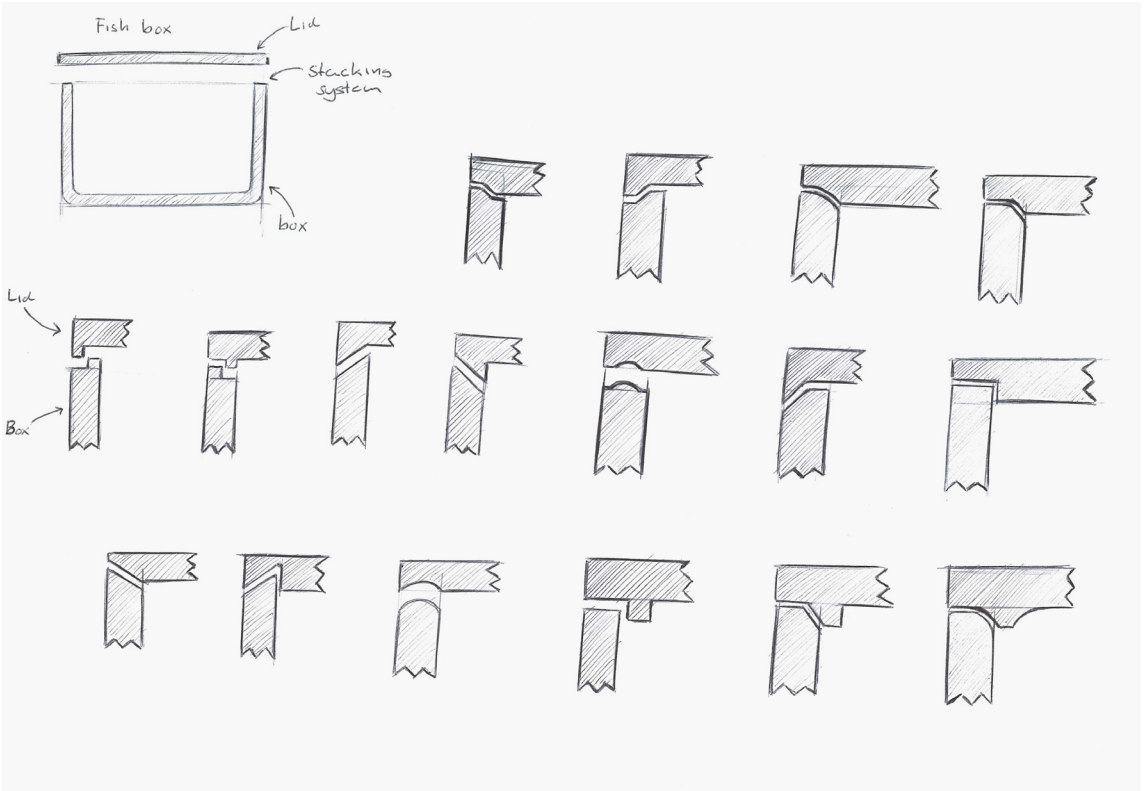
DRAWING SHEET 1- STACKING SYSTEM
